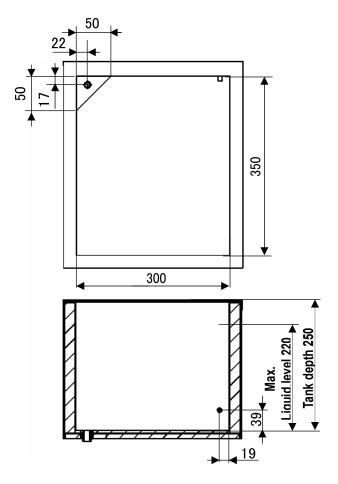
Bath dimensions (INR-244-734/-746)
